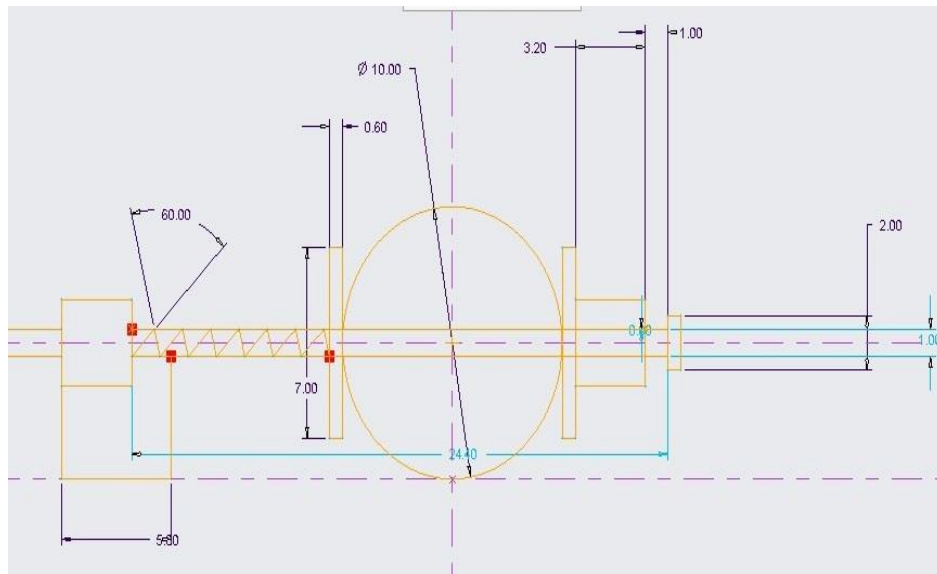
Geometric Dimension of Split Tensile Measuring Equipment
